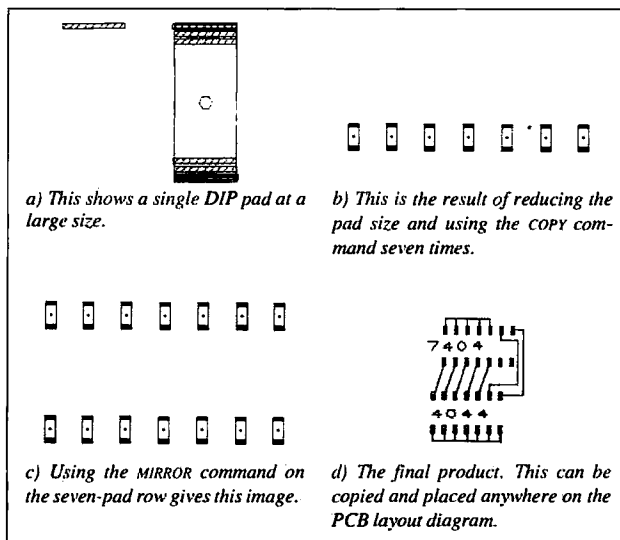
Using AutoSketch to draw a 14-pin DIP socket for PC board layout.
